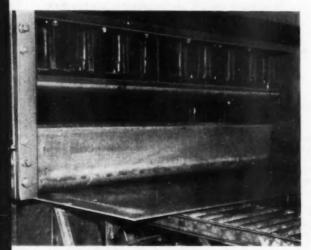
Track frames stamping as it appears after cold forming from 1/2-in. mild steel plate and ready for removal from the press.
